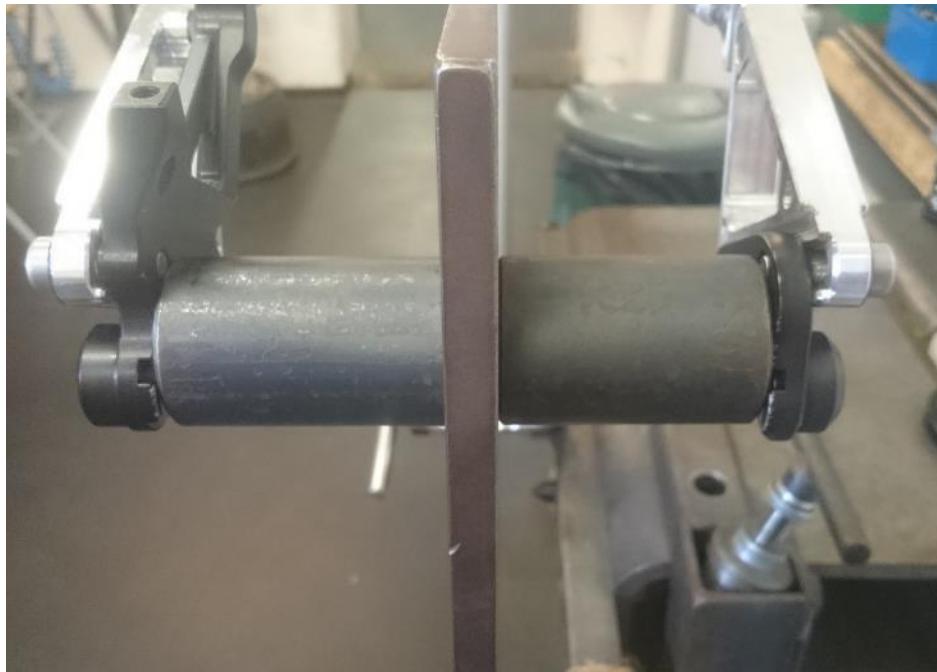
Template cylinders for ensuring compatibility with rear axle standard dimensions
